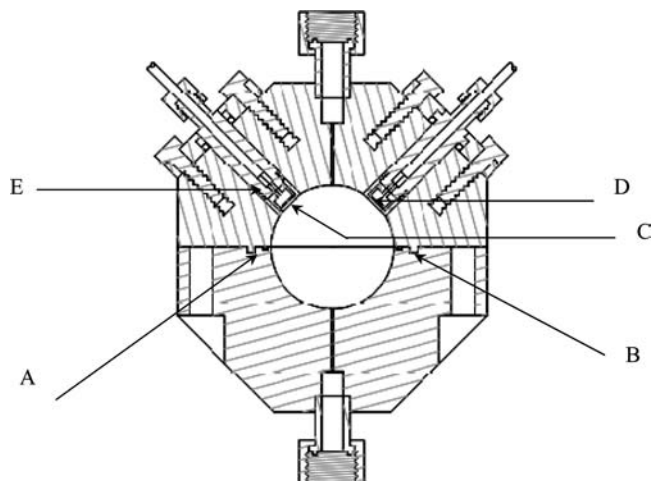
Cross-section through a spherical resonator fabricated as two hemispheres from a single cylindrical bar of type 316L stainless steel to form a cavity with a nominal internal radius of 25 mm.⁵ The acoustic transducers were fabricated to fit within ports, and each housing was sealed with a silver O-ring with separate flanges and bolts. The gas under test was sealed by a glass-to-metal seal E so that it was exposed to the transducer back-plate and active diaphragms C and D that were mounted flush with the resonator's interior surface. The hemispheres were then machined at the equator to form an interlocking step B, which ensured accurate concentric alignment about the polar axis, and made metal-to-metal contact at the inner spherical surface. A groove suitable for a silver O-ring A was machined into the equatorial surface. To form the 1.02 mm diameter inlet tubes for fluid flow in each pole, a hole was drilled to a total of 25.4 mm, and the remaining opened to a radius of about 9 mm. A face-seal fitting was welded into the outer end of the larger diameter tube.
